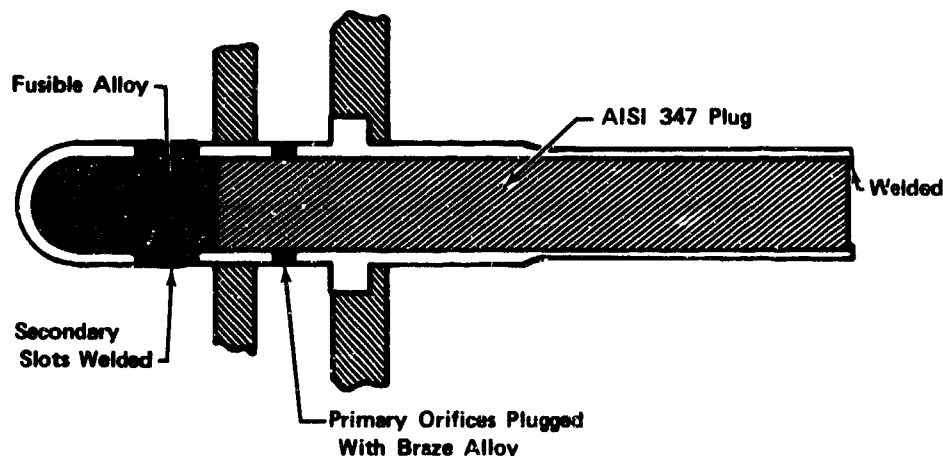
Six Elements With Blocked Primaries Plugged By Welding
